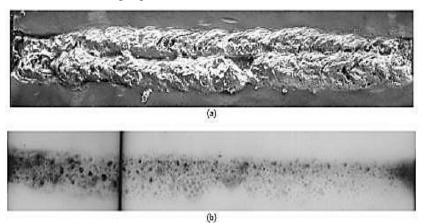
Wet Underwater Welding at a Depth of 100 m (a) and the X-ray Image (b)
